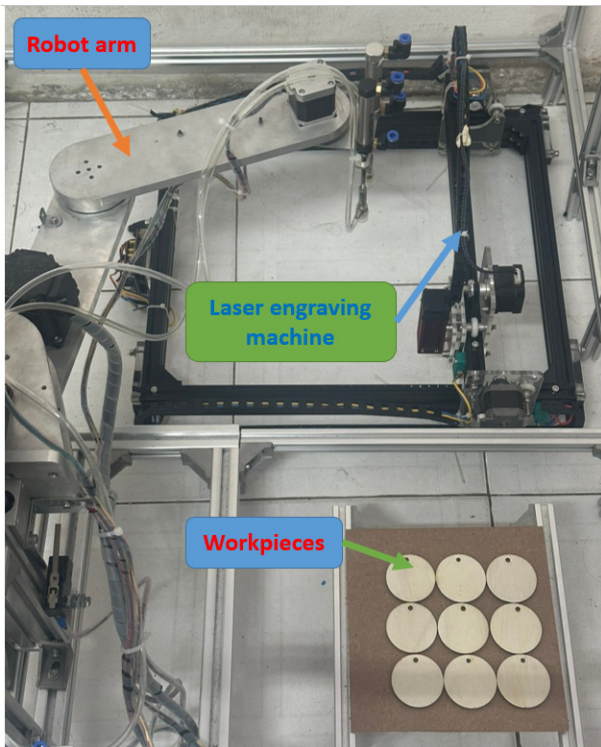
The experimental model to perform the automatic workpiece feeding process for the engraving machine.
